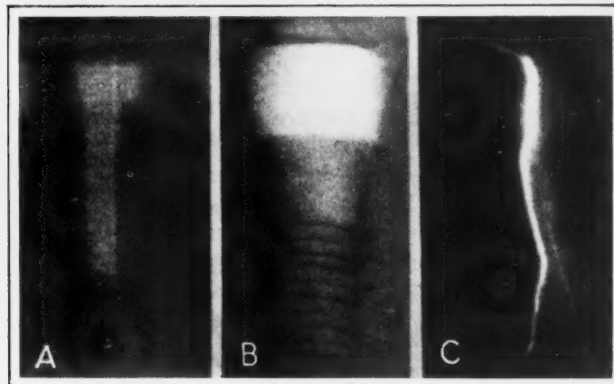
Bolts and Boiler Plate Showing Internal Defects (Full Size)
